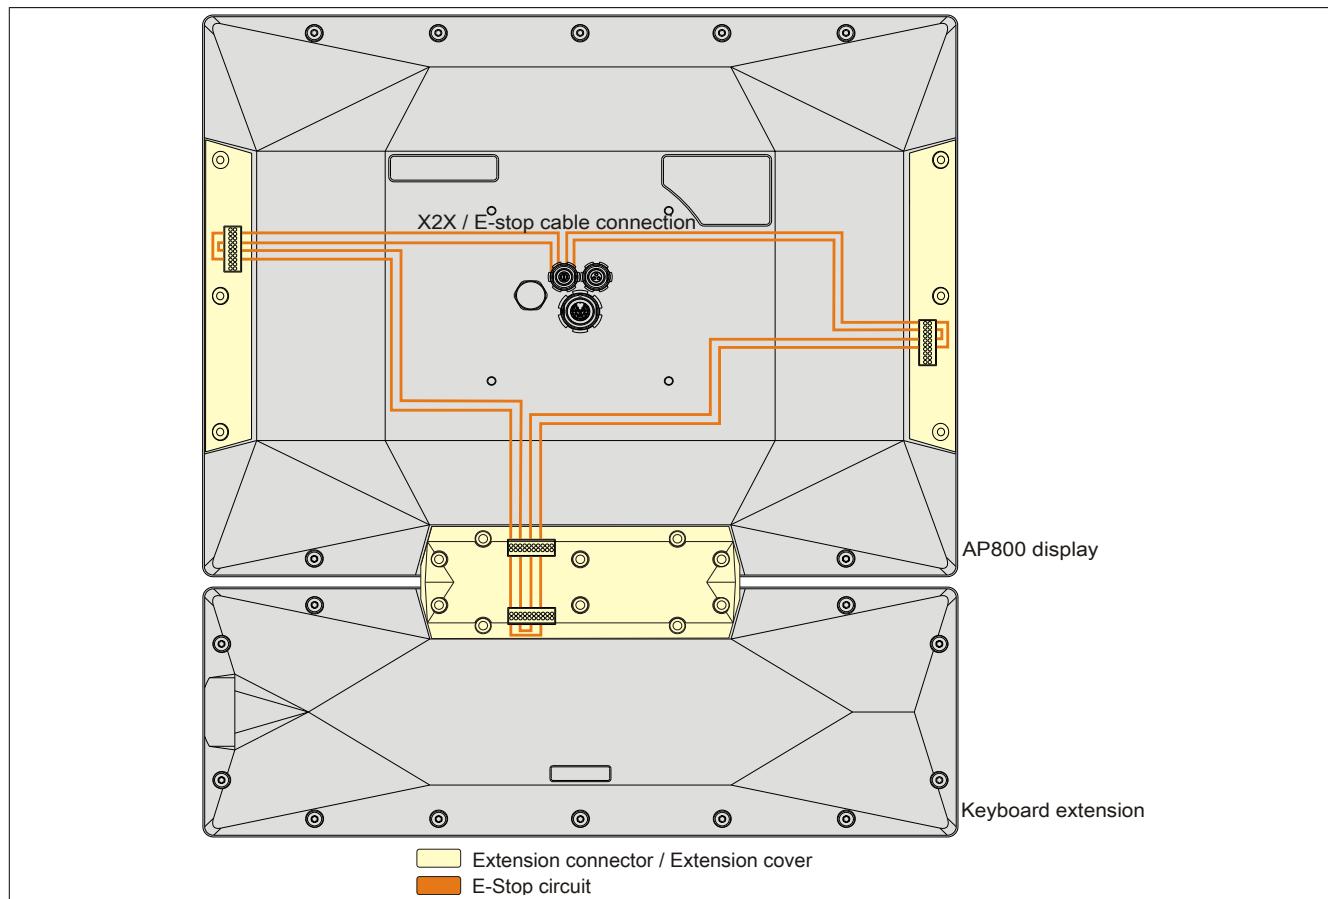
Example 3 - E-stop wiring diagram for the extension unit without E-stop - rear view
